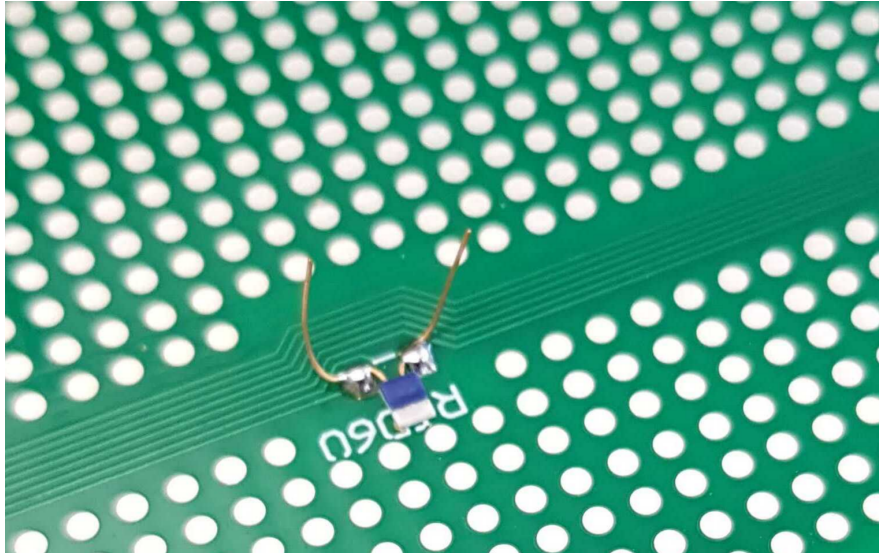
RTD solder connection to surface mount pad on PCB RTD array tooling.
